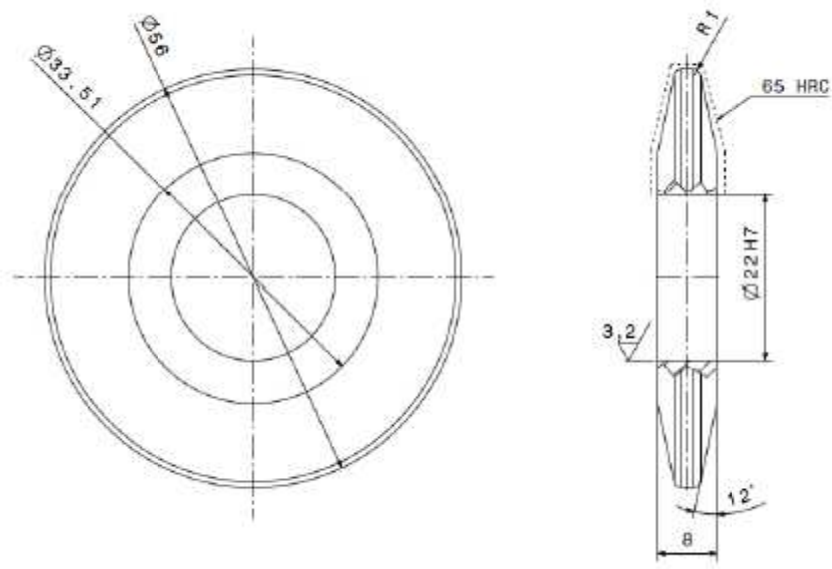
Disc cutter geometries (all dimensions in mm)(1)
